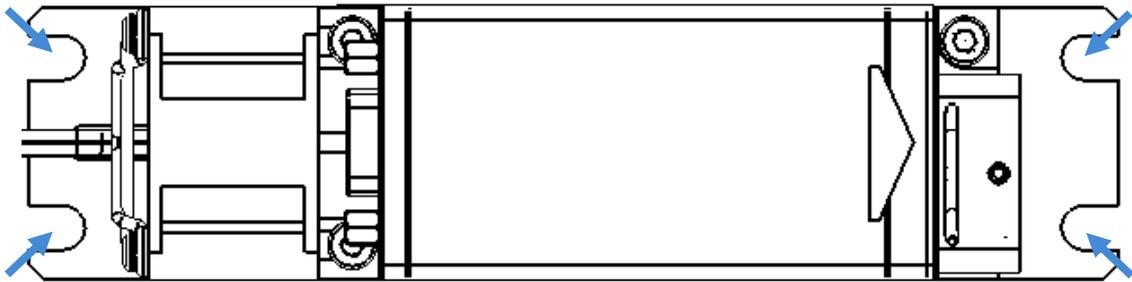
Mechanical specifications of the plate supporting the laser head
